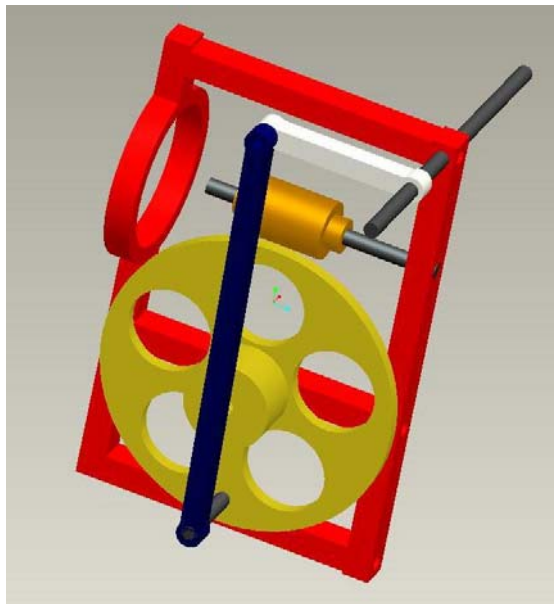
A clear view of the rotating mechanism. The crank-rocker mechanism is evident and so is the worm-and-gear set. As the motor drives the worm, the gear causes the crank-rocker to move back and forth. Because the rotator is attached to the wing, this ultimately causes the entire wing to rotate.
